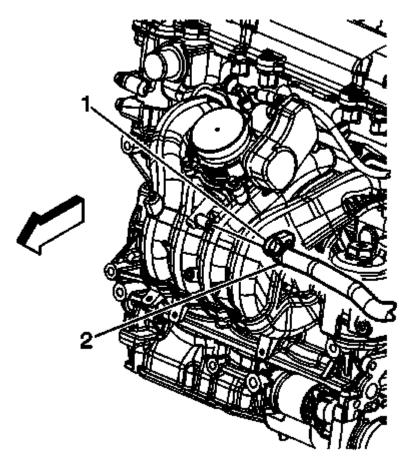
Vacuum Brake Booster Hose And Clamp Courtesy of GENERAL MOTORS COMPANY
